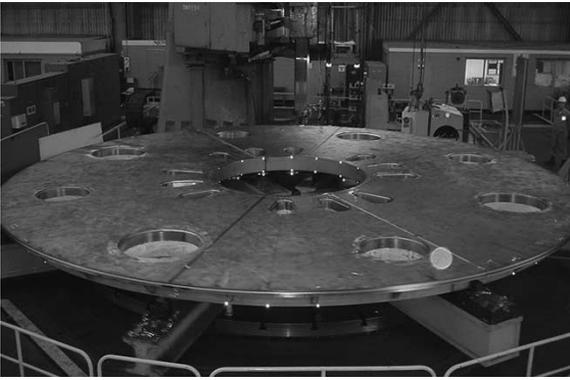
Machining of cryostat base plate (May 12, 2003).
